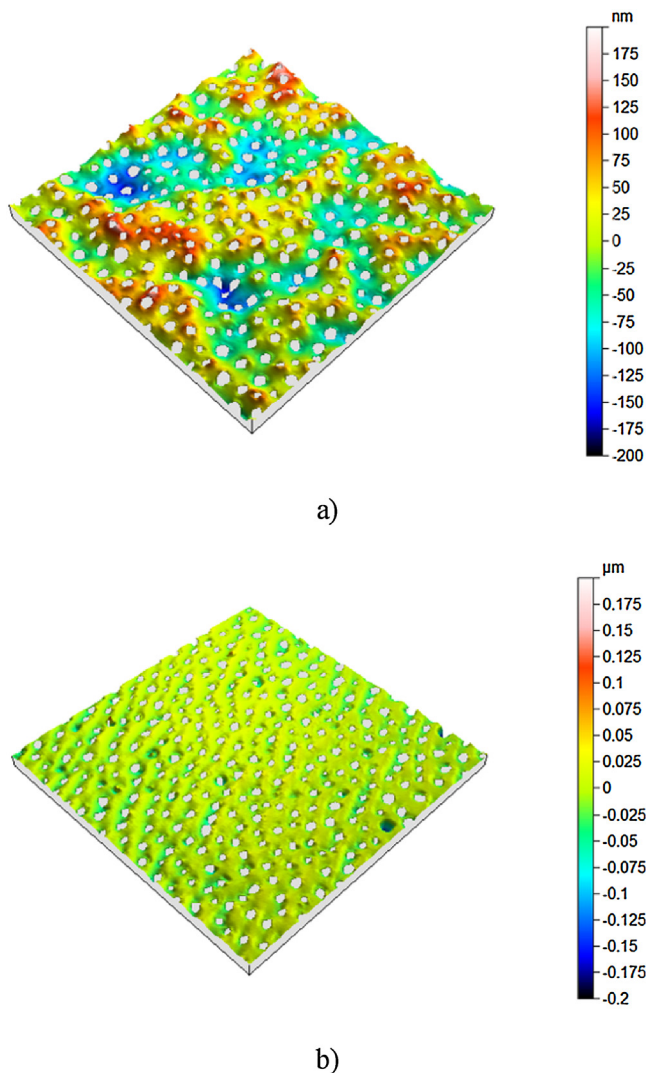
3D surface topographies of original porous silicon and machined one a) Original surface b) Machined surface.
